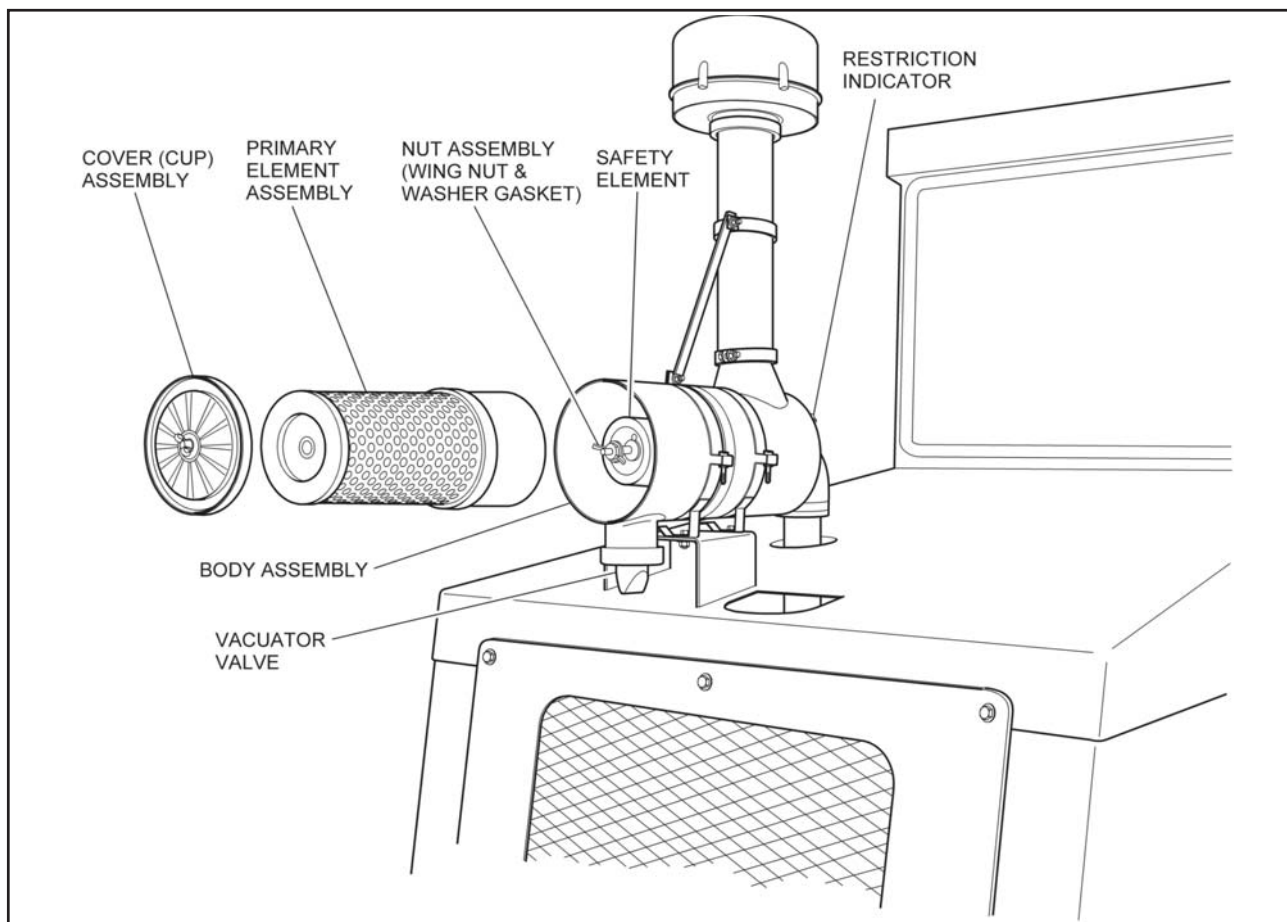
ENGINE AIR CLEANER ASSEMBLY
